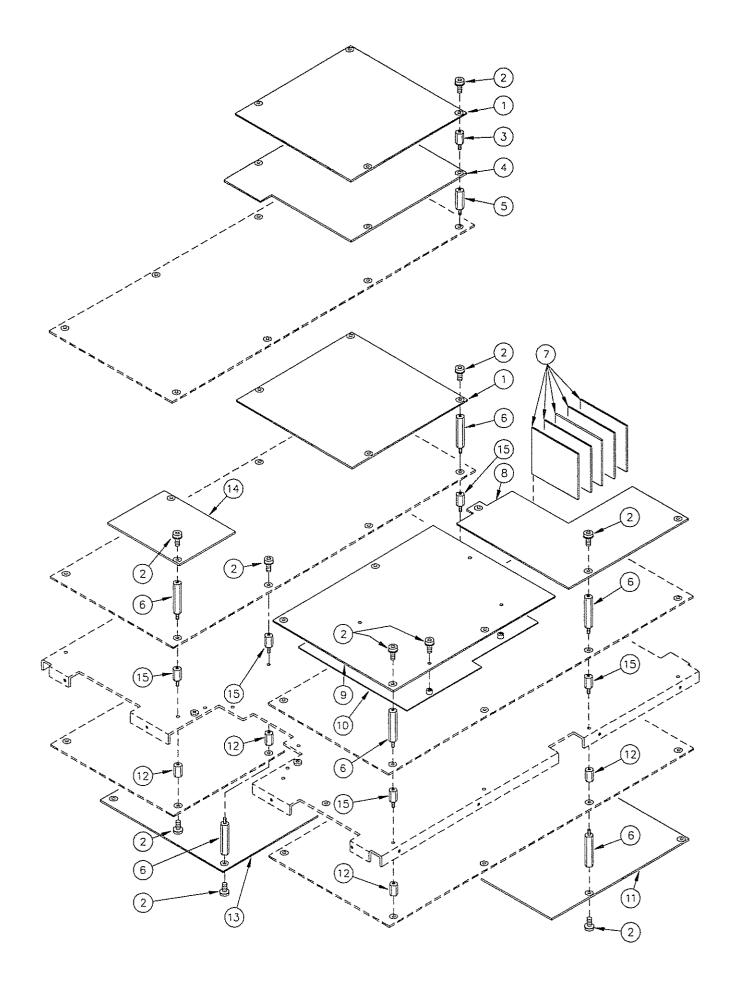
CIRCUIT BOARD ASSEMBLY
